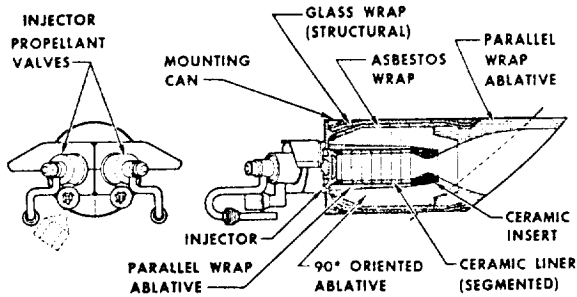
25-pound thrust reentry control system thrust chamber assembly designed and manufactured by Rocketdyne.
